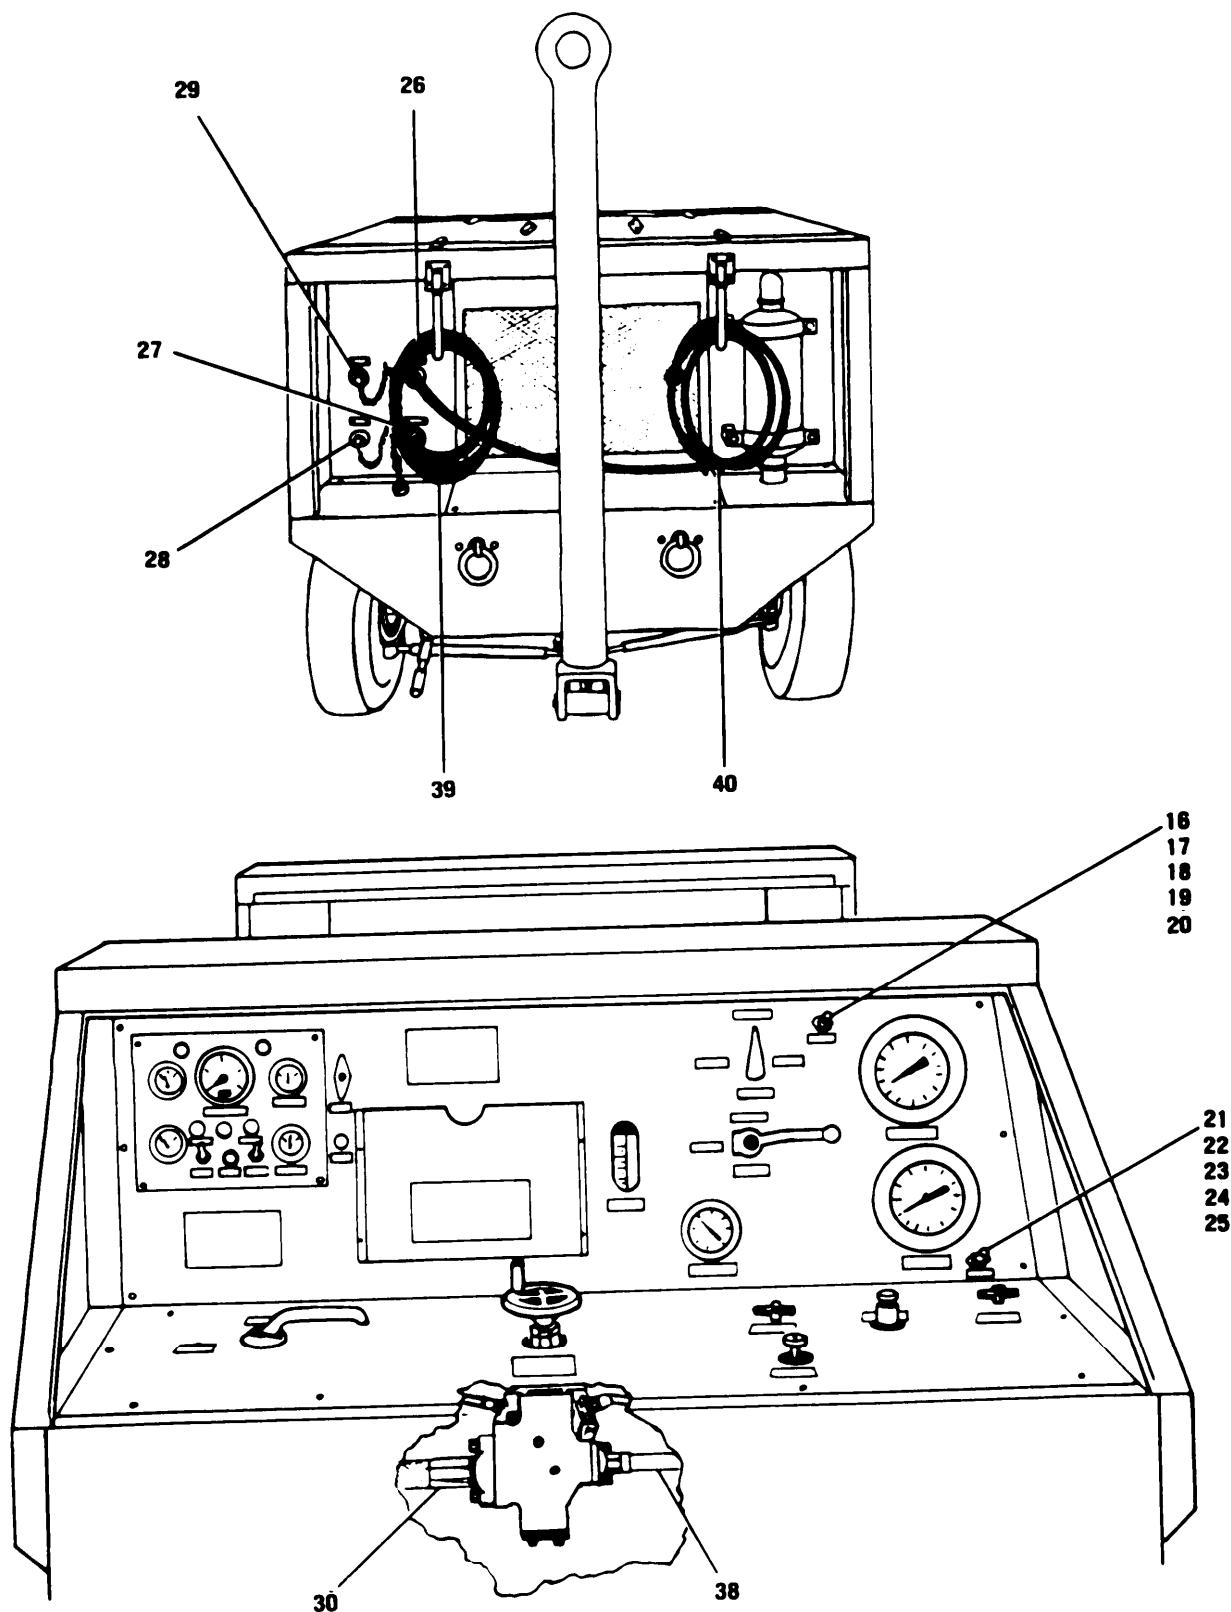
Lines, Tubing, Fitting and Hose Assembly (Sheet 3 of 3)
